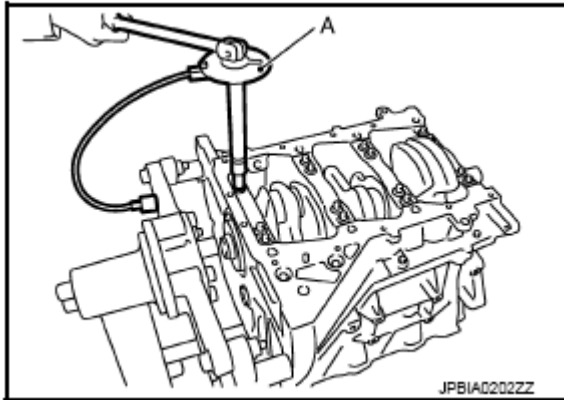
Checking Lower Cylinder Block Bolt Tightening Angle Using Angle Wrench
